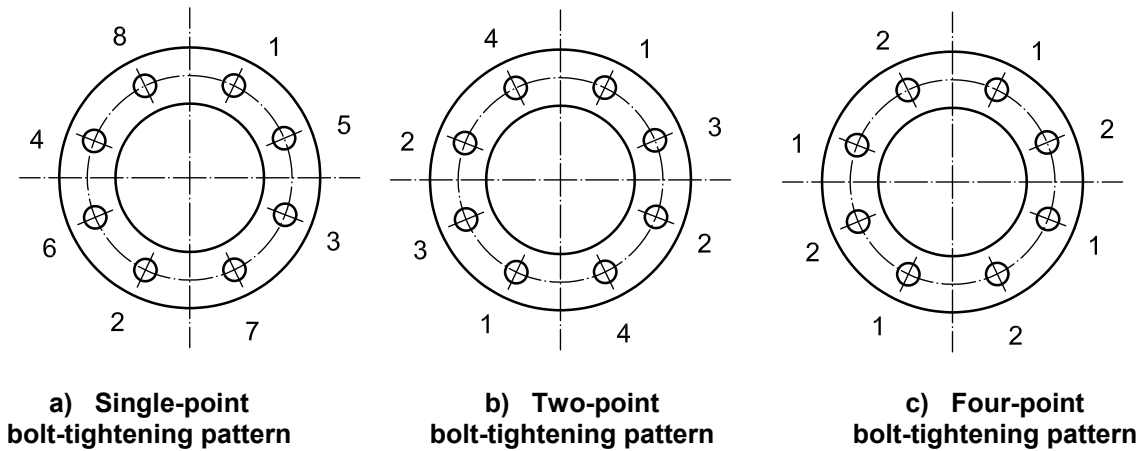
Cross-bolt torque tightening sequence for one tool, two tools and four tools
